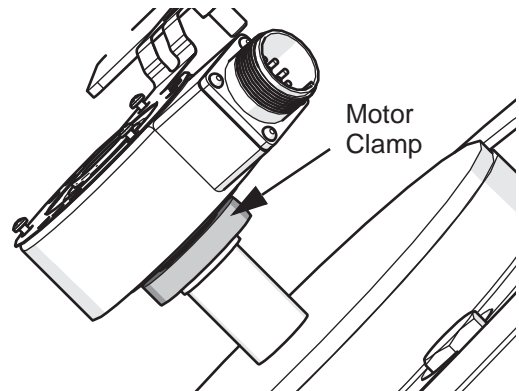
Encoder with Motor Clamp Inside (Motor 2)
